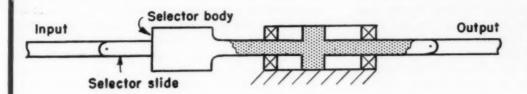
Simple mechanically linked servo arrangement of a selector body mounted on the piston rod
